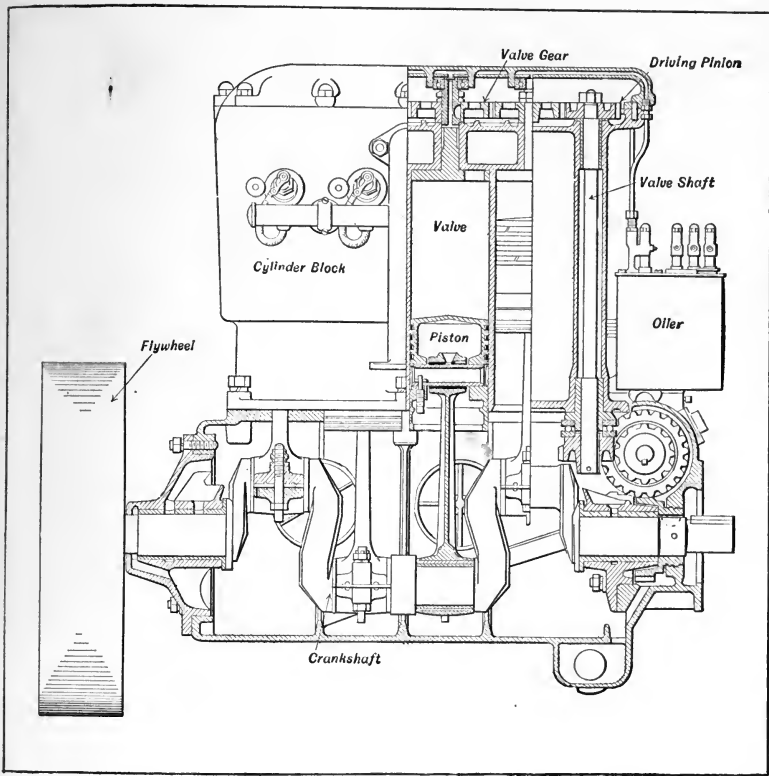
Part Section of Reynolds Rotary Valve Motor, Showing Practical Application of Ported Disk in Controlling Gas Passages. Note Compact Design of Cylinder Block and Two-Bearing, Four-Throw Crank Shaft.
